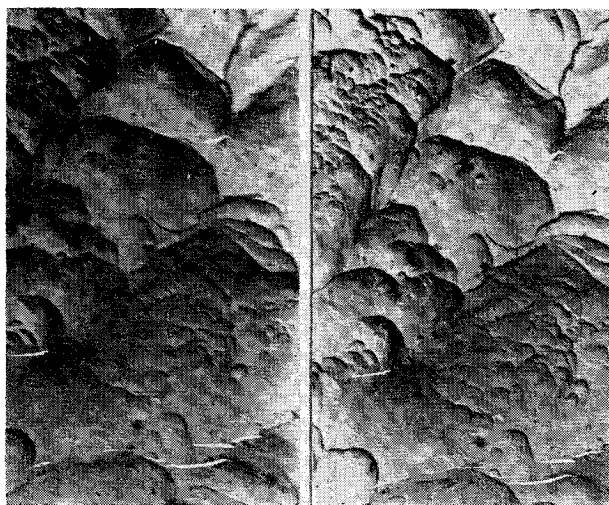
Electron fractograph showing typical ductile (dimple) failure (stereo pairs).
